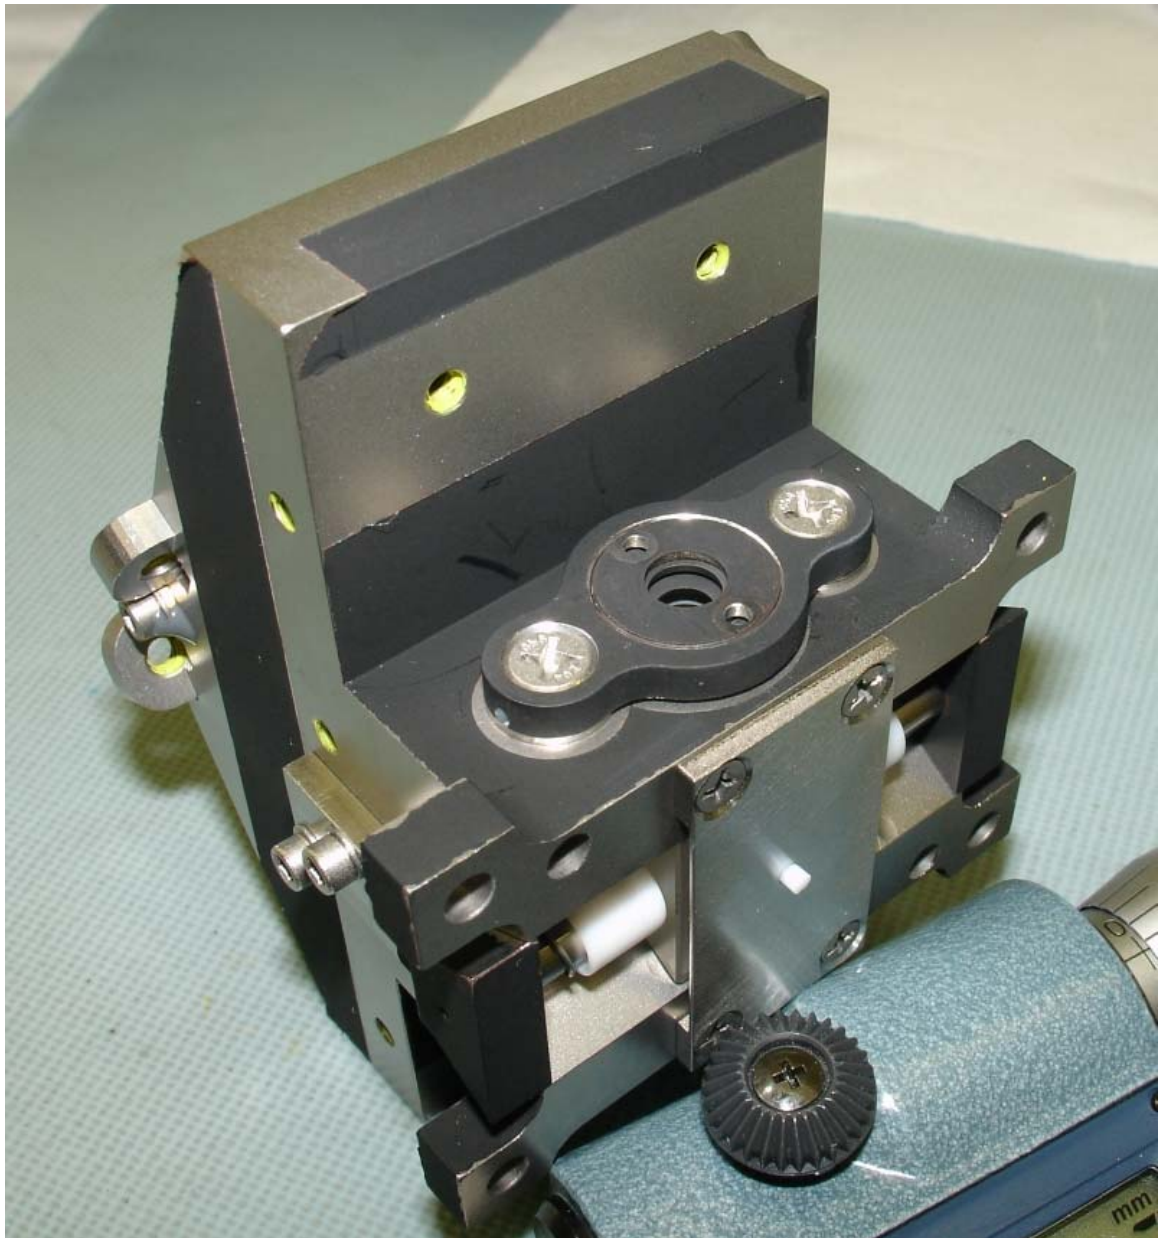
This image shows the lens cell assembly installed in the optical housing. The prism which acts as the second fold mirror is also shown held in the V groove in the bottom of the optical housing.
